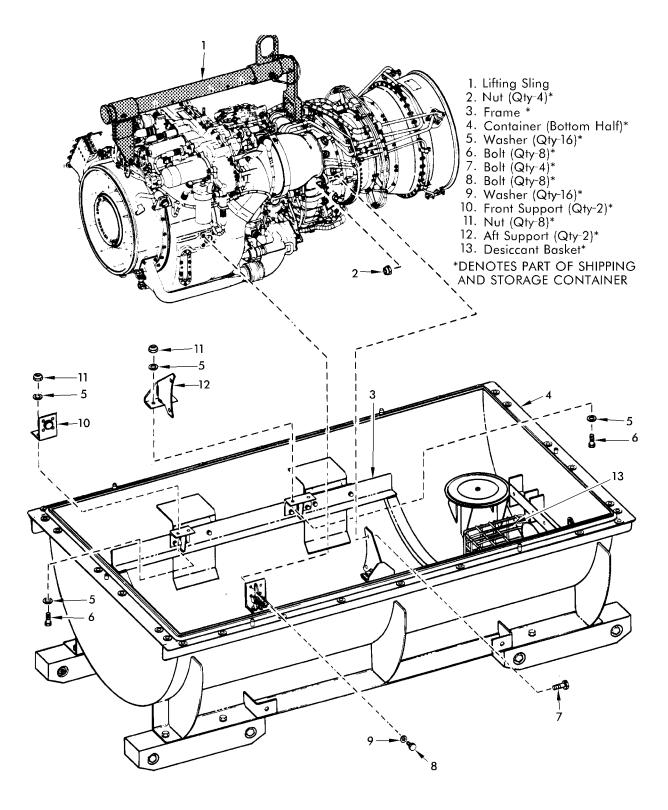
Shipping and Storage Container 8145CON004-1; Removal and Installation of Engine or Cold Section Module
